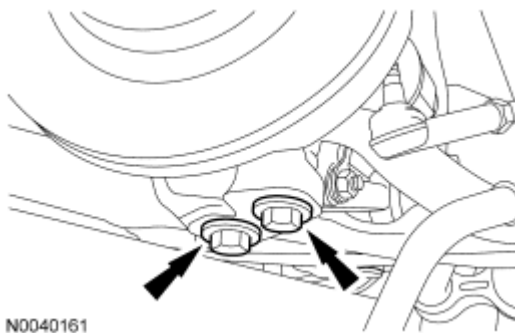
Locating Engine Roll Restrictor Bracket Bolts
